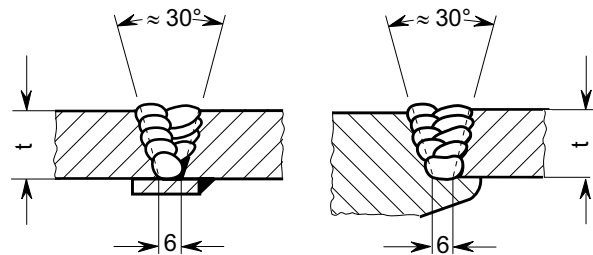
Single-side welds with permanent weld pool supports (backings)
